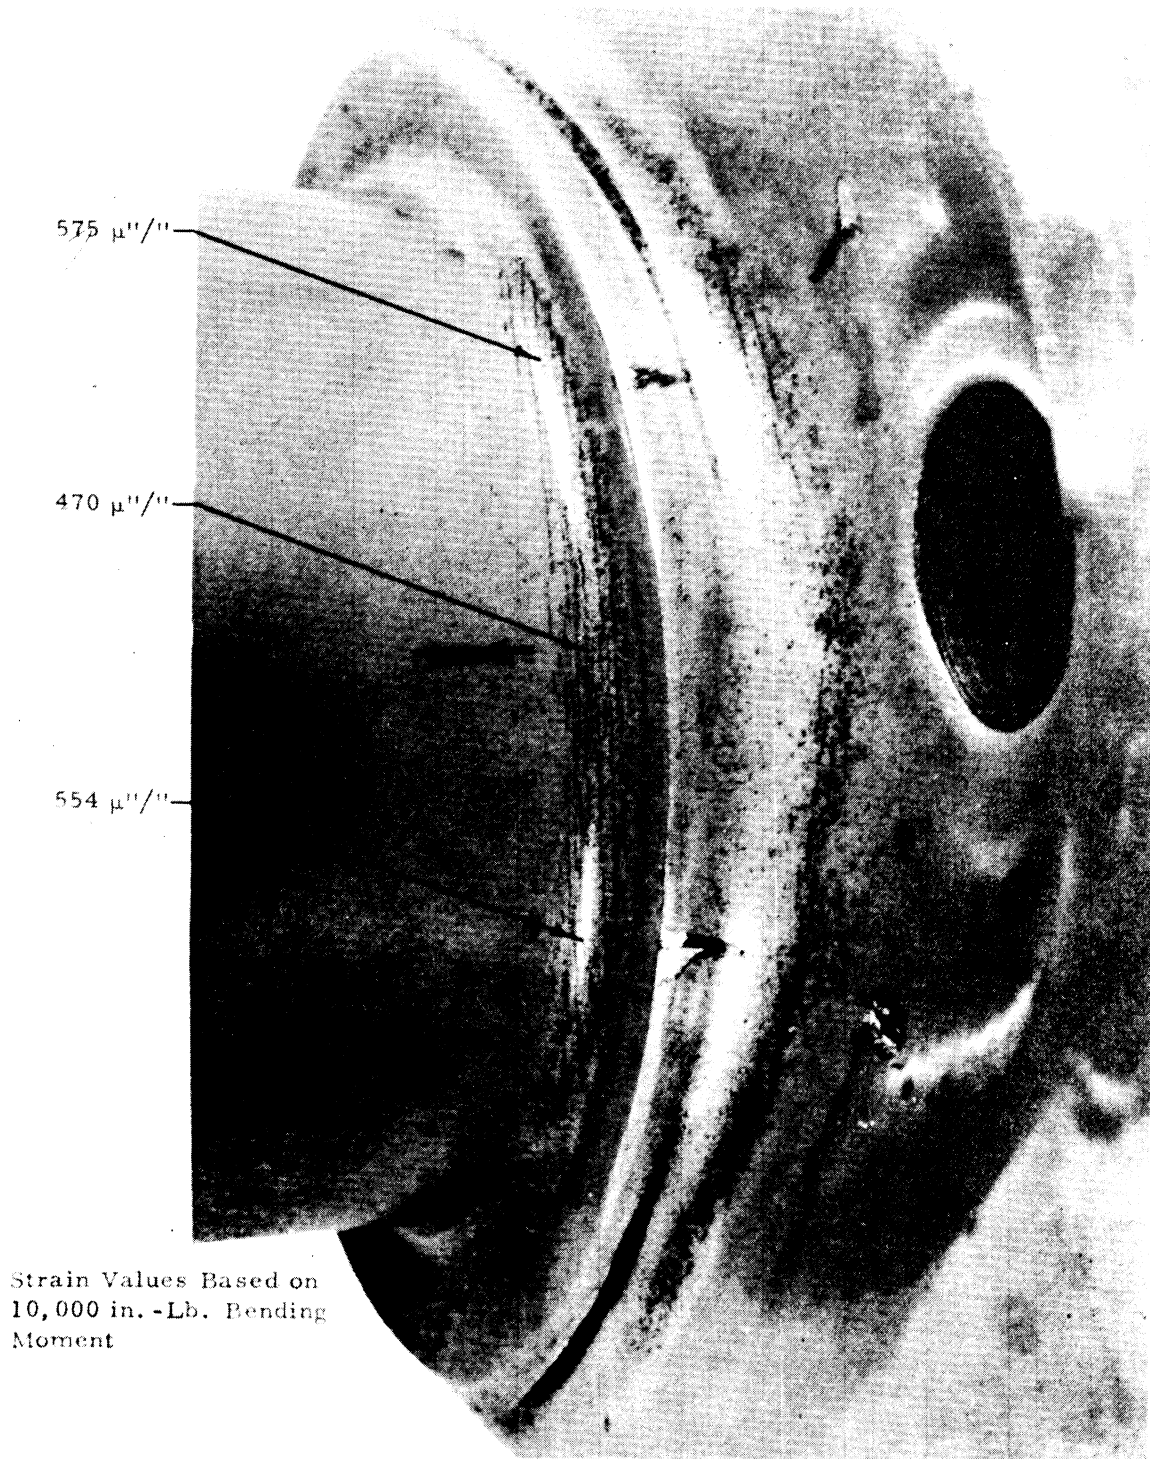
Stresscoat Pattern on Experimental Cast Steel Crankshaft (Modified Fillet) S.L. 258.
